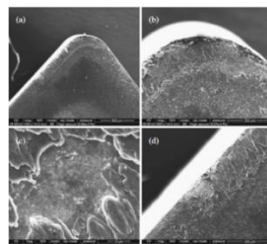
SEM photograph of rake faces of grooved tool after 6 min machining: a) Rake face, b) Rake face close to nose, c) Crater, and d) Chipping (cutting speed of 50 m/min, feed rate of 0.1 mm/rev, and depth of cut of 1.0 mm) [17]
